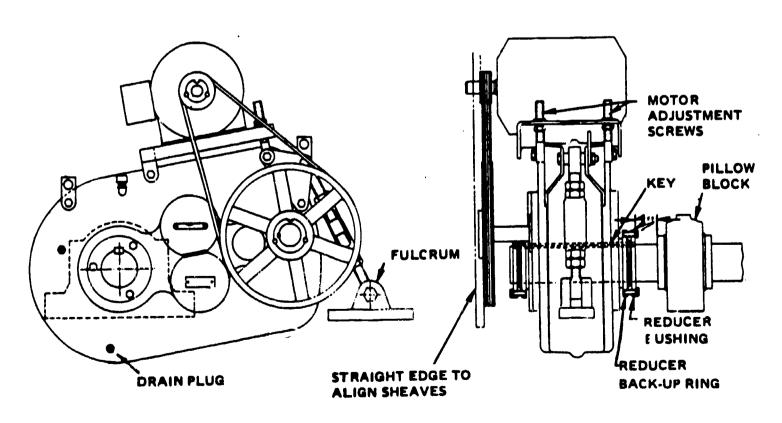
Triple Reduction Gear Reducer with Direct Drive
